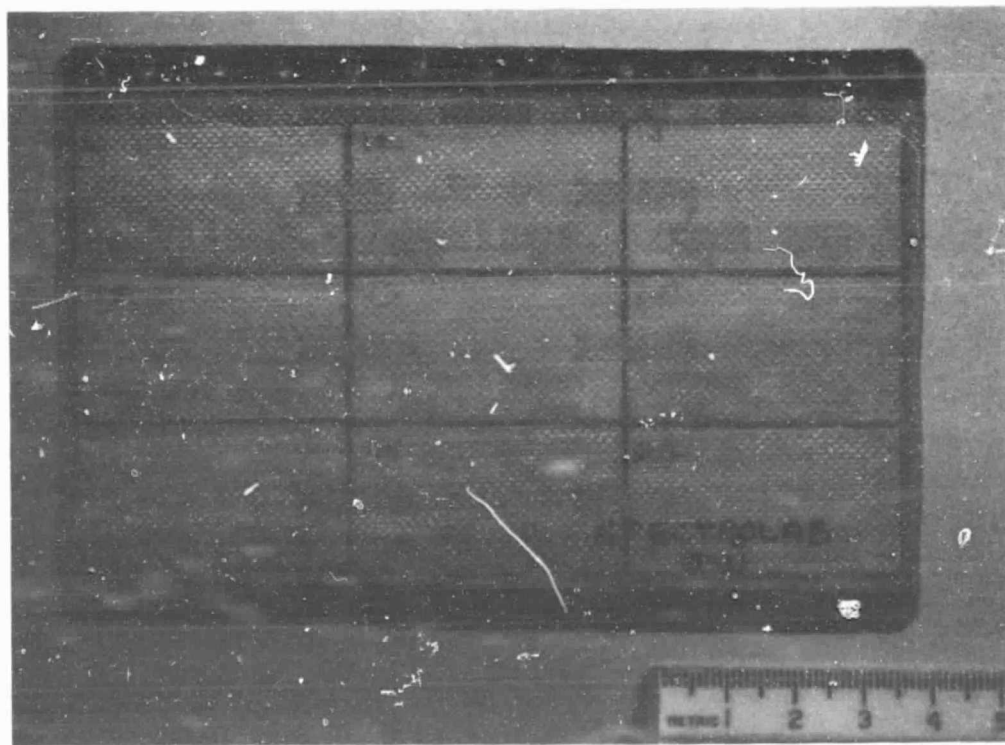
PARALLEL GAP WELDED MODULE BACK
